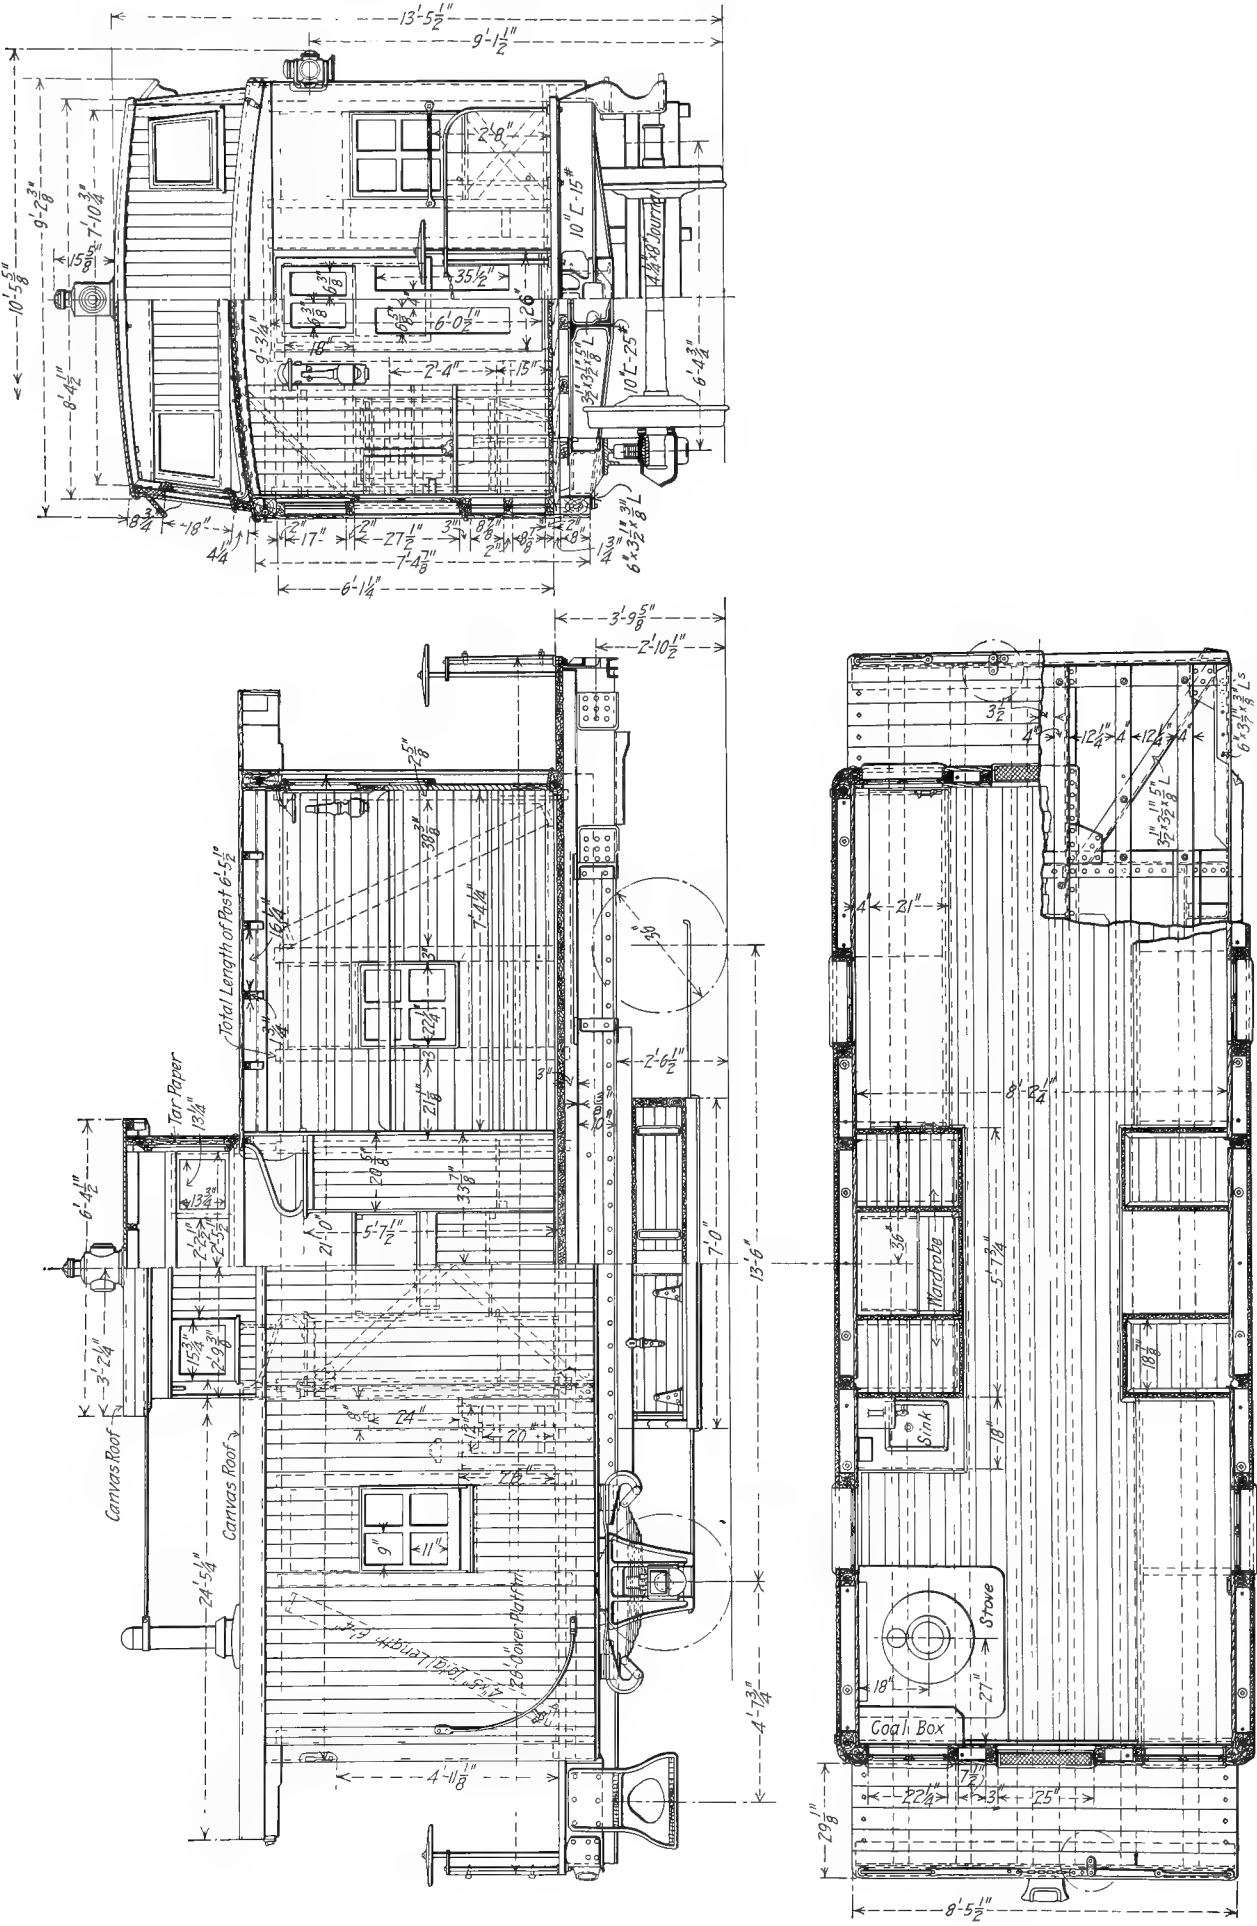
Pennsylvania Railroad Steel Underframe 4-Wheel Caboose or Cabin Car Shown in Fig. 117.
